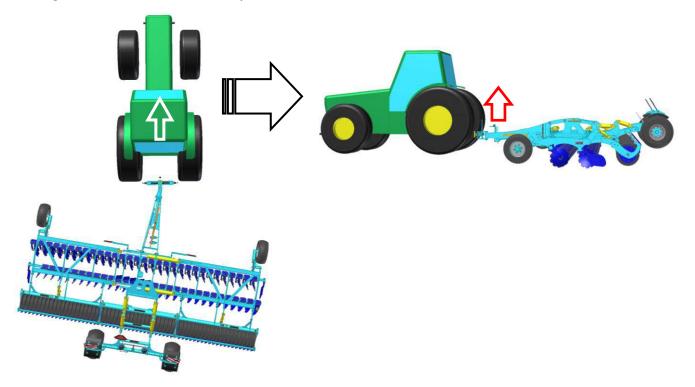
When the machine turns to the left-hand side, lower the machine in arms
